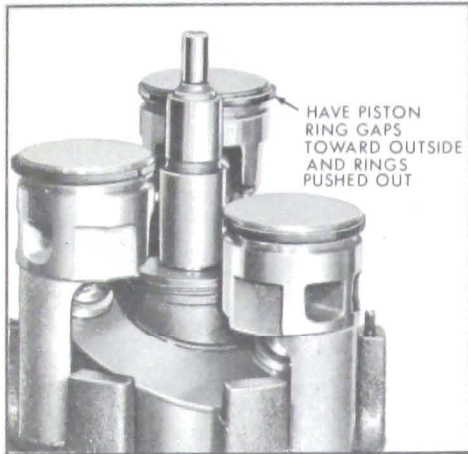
Pistons Positioned in "Stair Step" Arrangement
